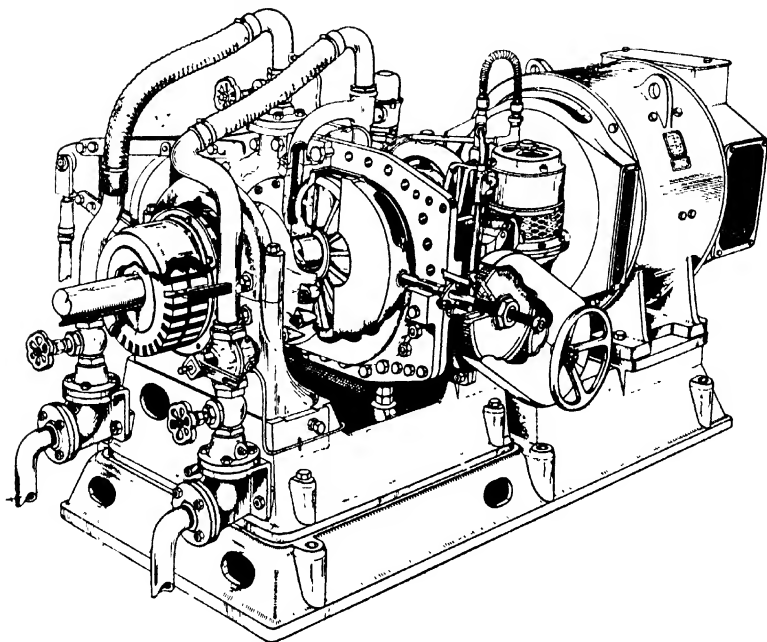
SECTION OF FROUDE HYDRAULIC DYNAMOMETER
